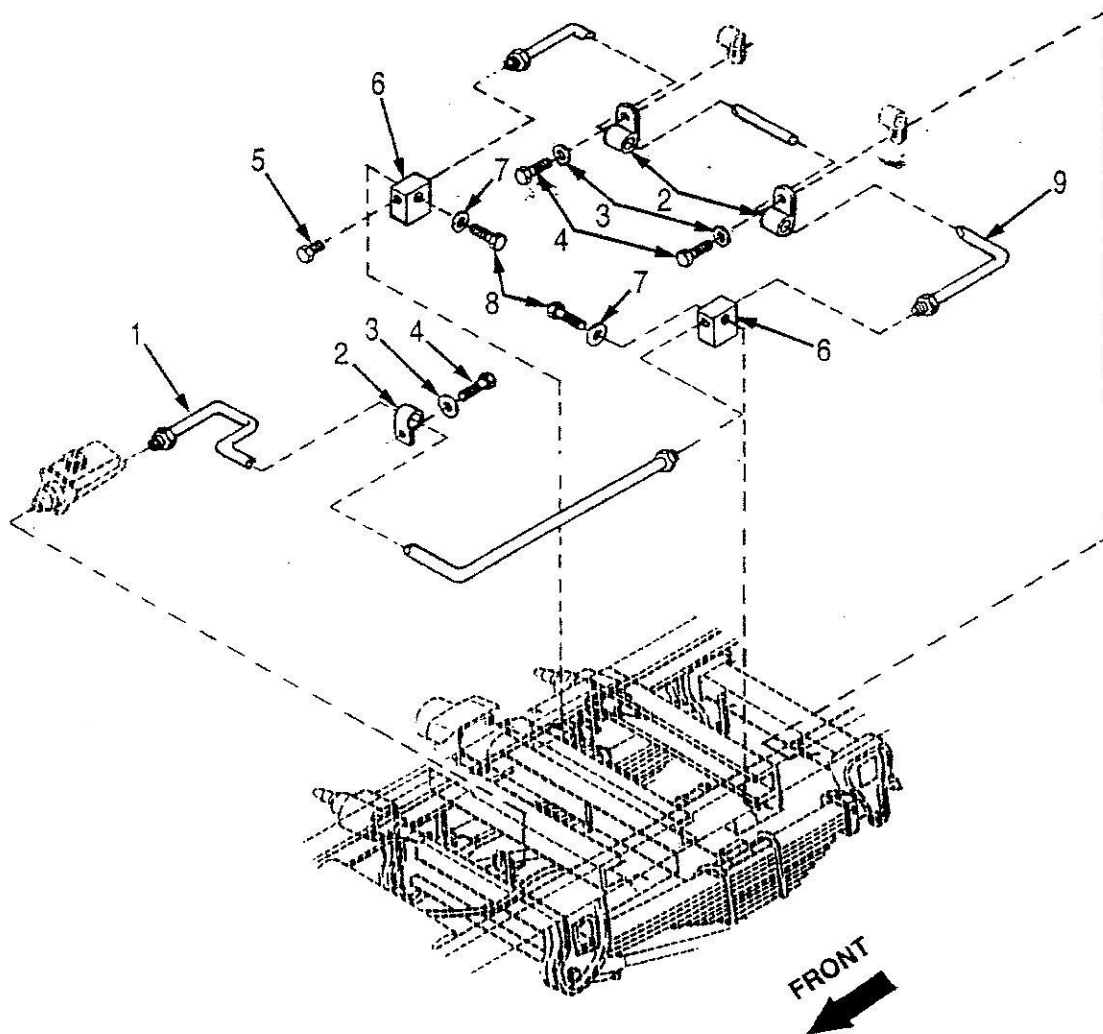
Front Frame Brake Lines, Hoses, and Fittings
